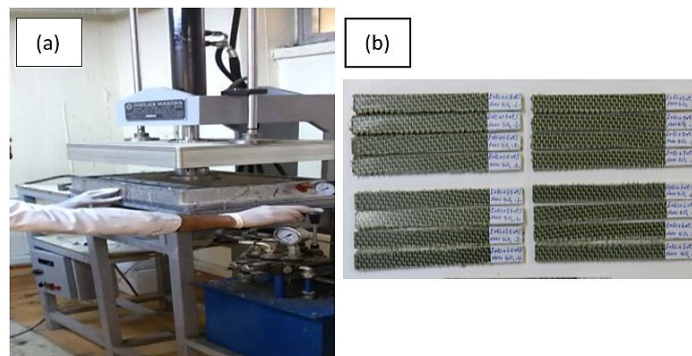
Production process and test samples. (a) Hot mold press, (b) Test samples
